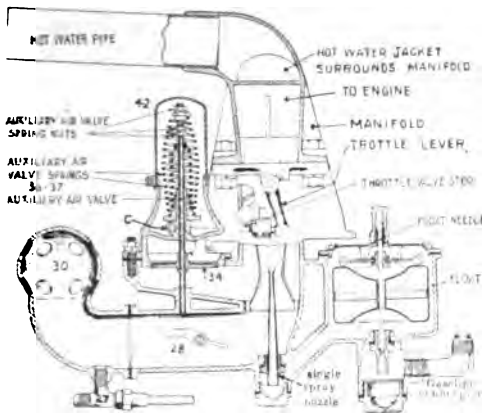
The Packard Carburetor. The Fuelizer (fig. 2) is not attached.
